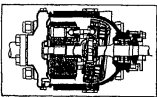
SECTION OF ONE ELEMENT OF THE JANNEY-WILLIAMS HYDRAULIC VARIABLE GEAR
